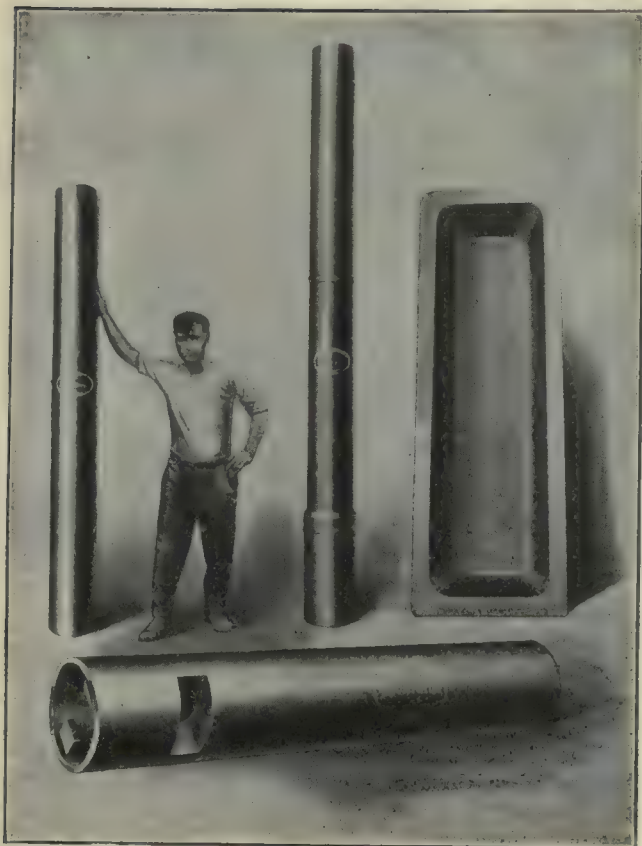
TUBES USED FOR CARBONIZING RETORTS
